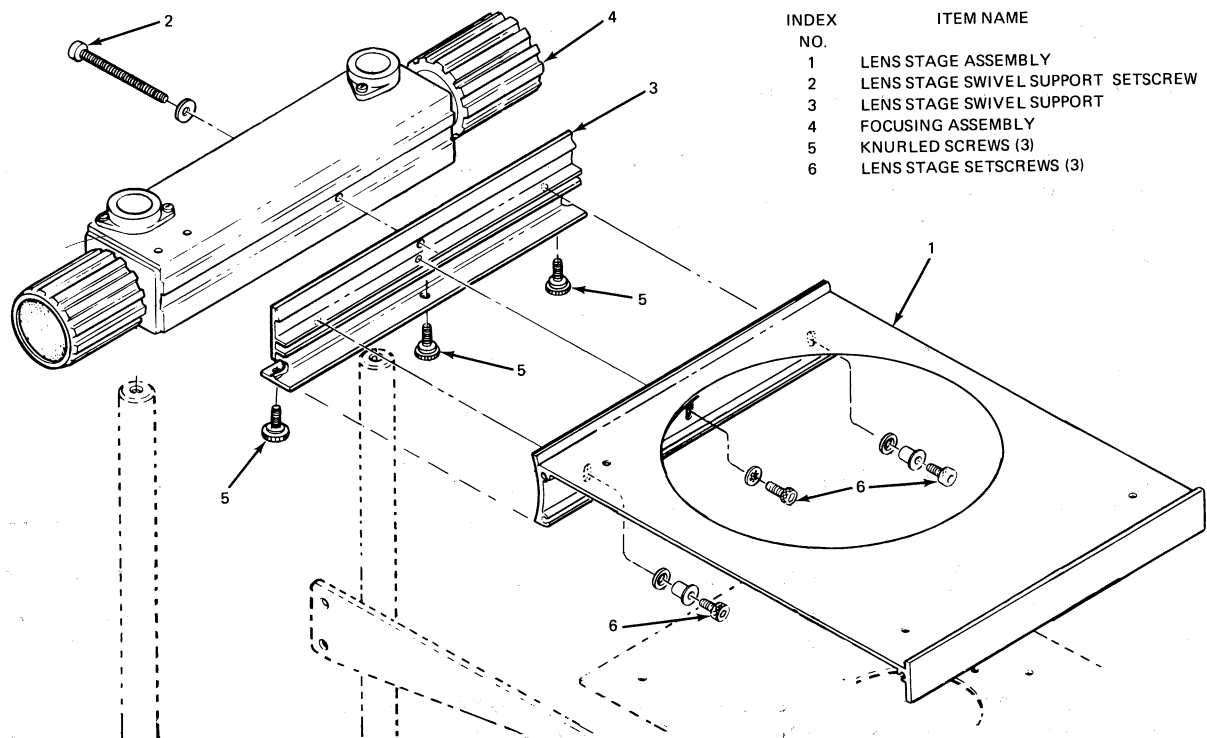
Lens Stage Adjustments, Partial Exploded View
